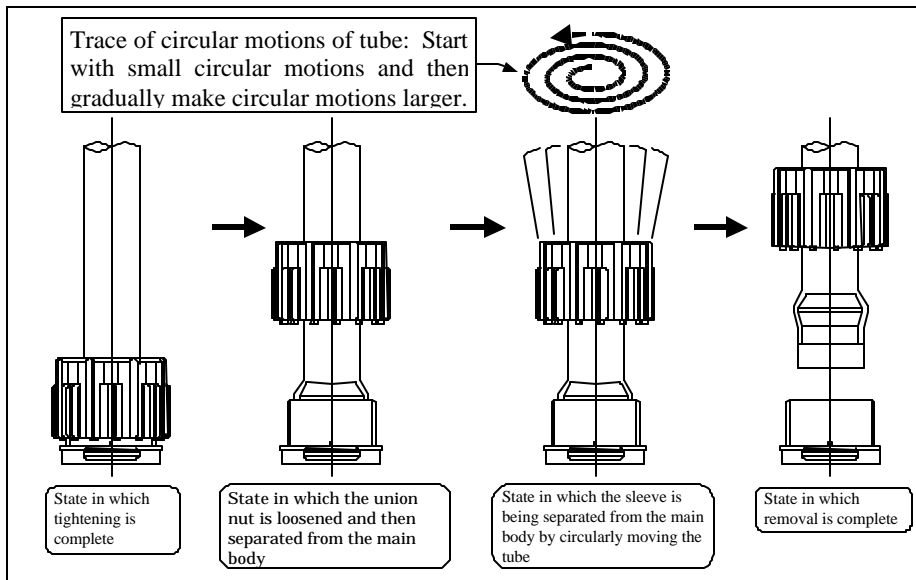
How to remove P series Super 300 Type Pillar Fitting (for 1-1/4", 1-1/2")
